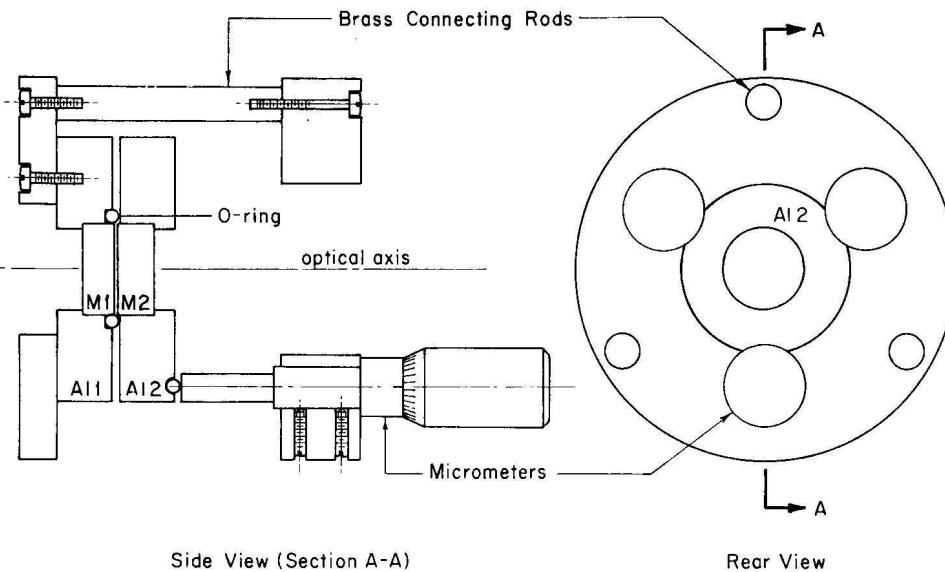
A schematic drawing of the short cavity dye laser (not to scale) showing the mirror-ring assembly (M_1-AL_1 and M_2-AL_2), the main frame ends connected by the brass connecting rods, and the micrometers. In the side view shown, laser pulses would travel from left to right.
